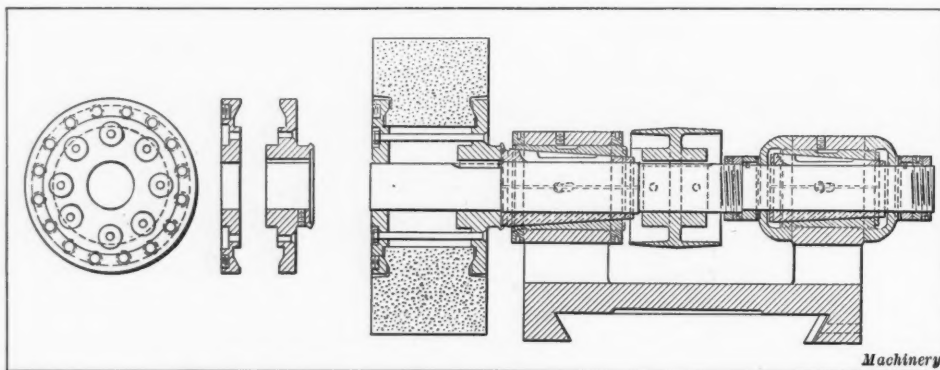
Arrangement of Wheel-spindle Bearings and Mounting of Wheel on Spindle
